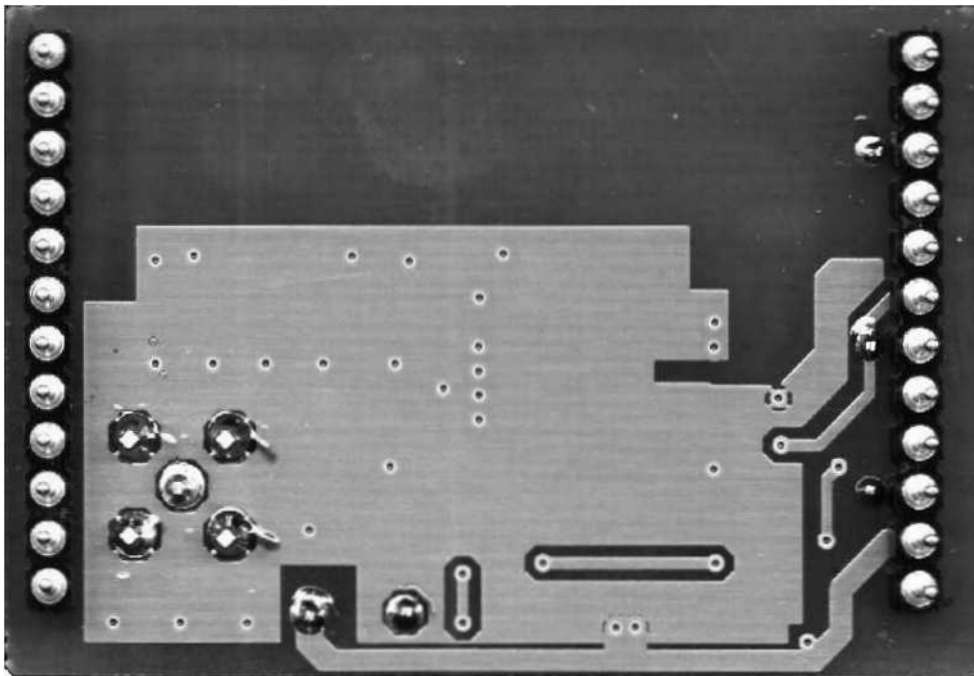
Solder Side of Receiver Application Board (SAW)
